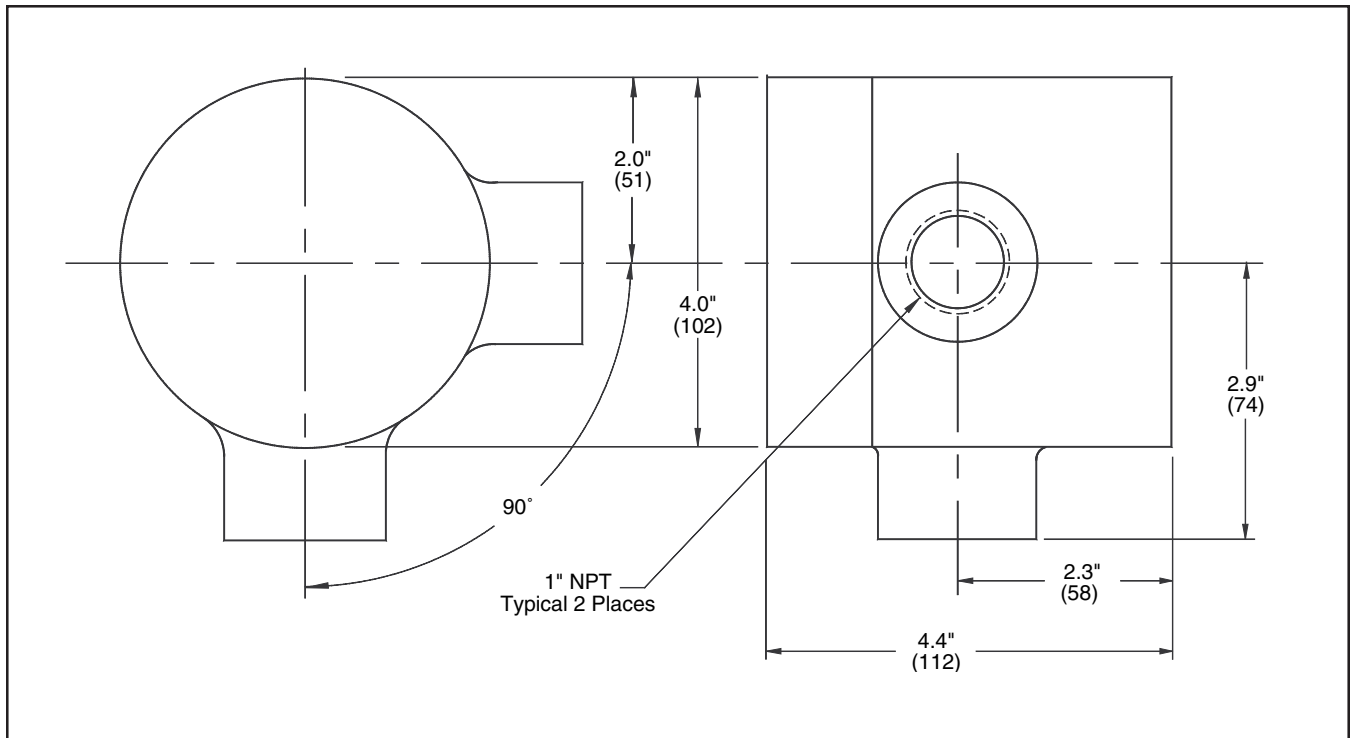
FA420 Mounted in CUL and CENELEC Approved Enclosure
